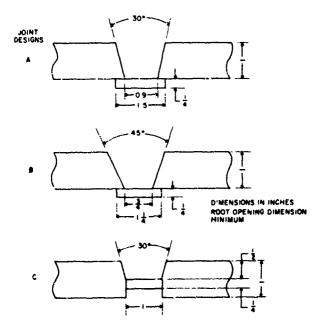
Suitable joint geometries for weld metal DT test specimens
